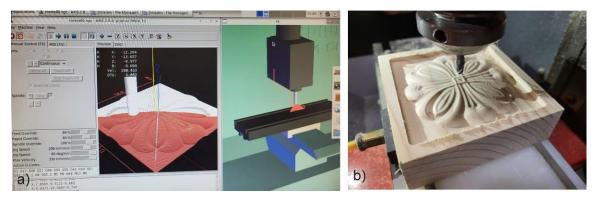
Machined workpiece based on STL model with the vertical configuration of the machine
